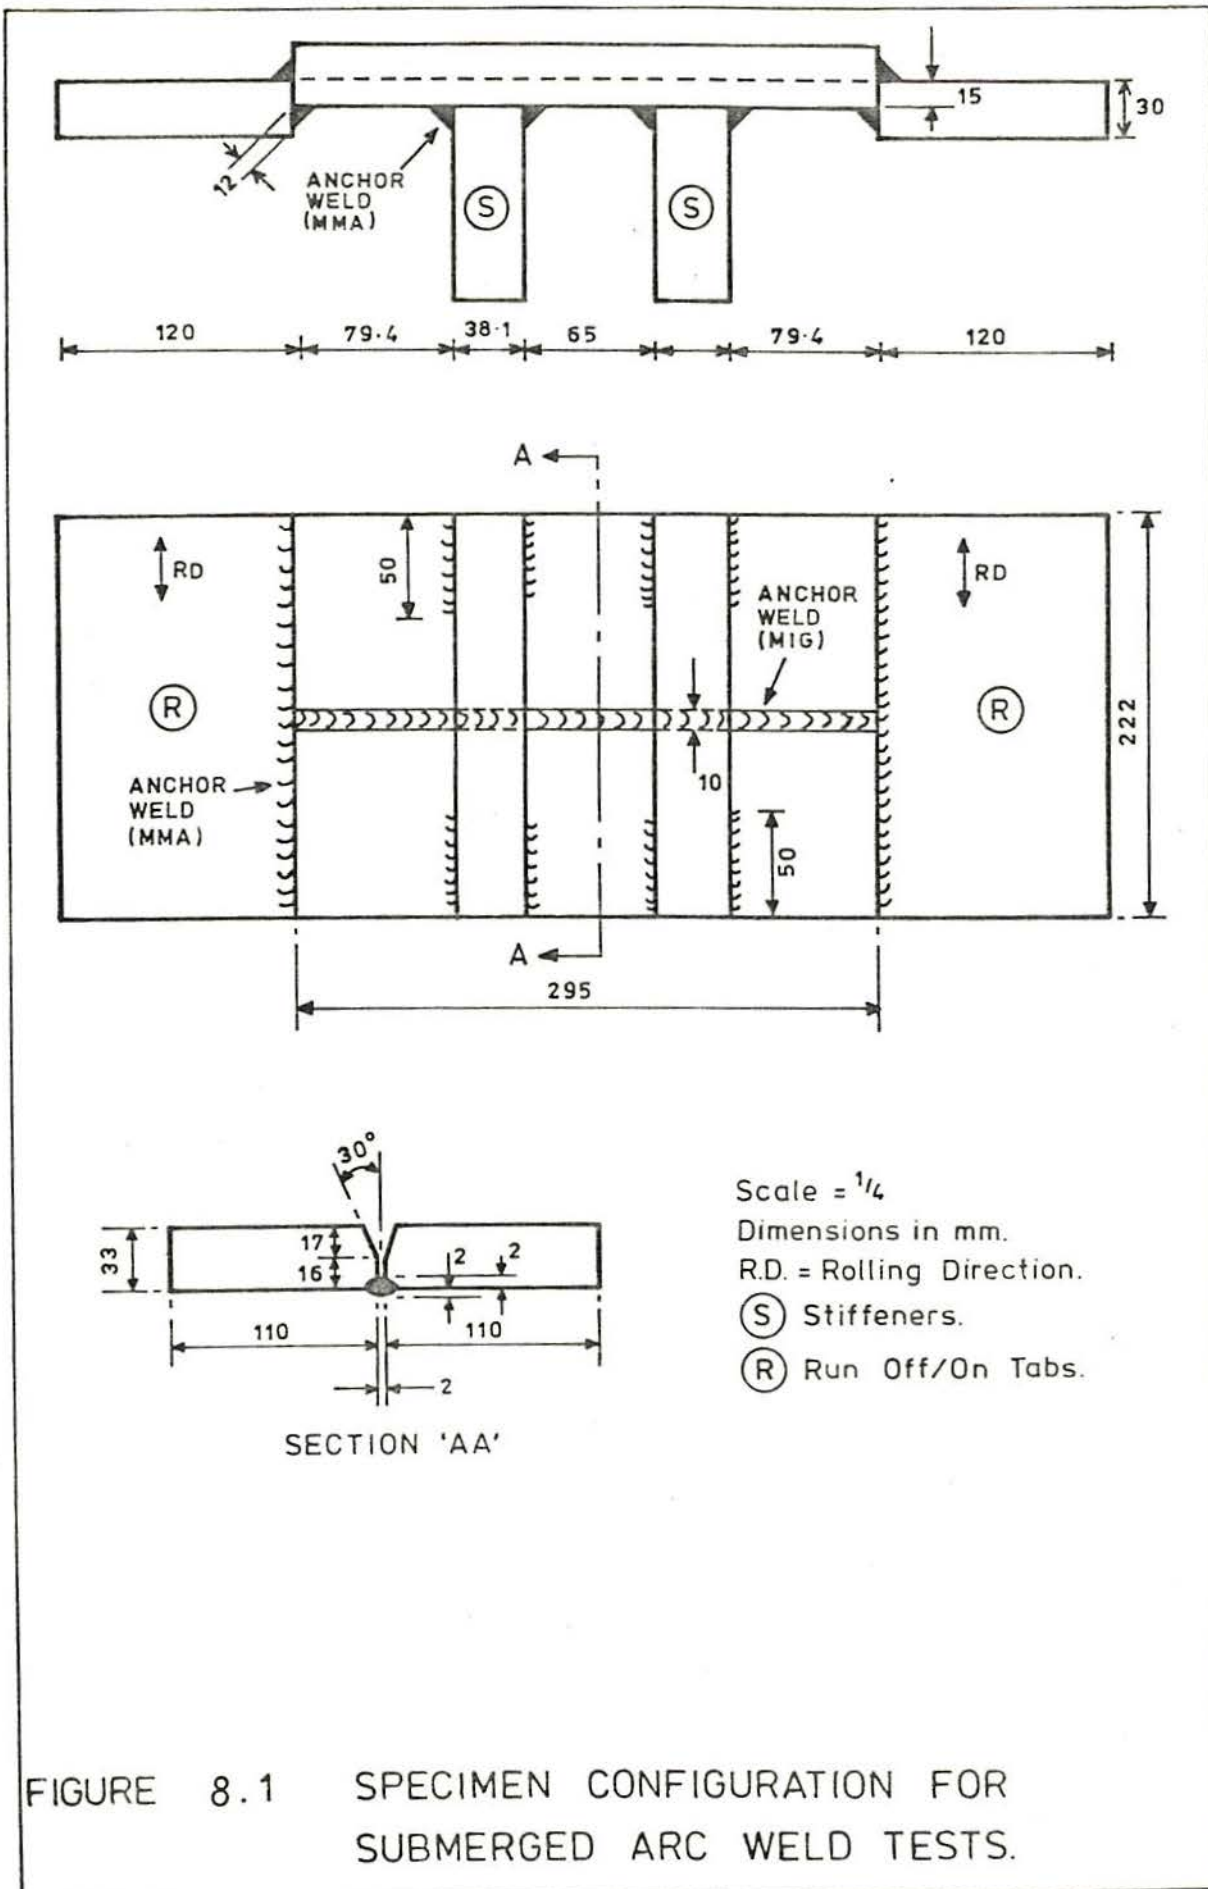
SPECIMEN CONFIGURATION FOR SUBMERGED ARC WELD TESTS.
